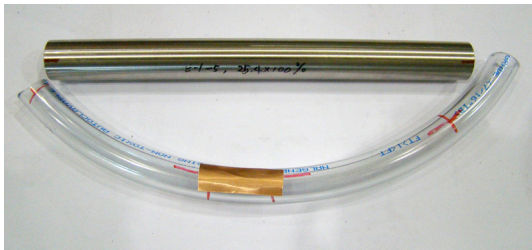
Tube specimen with a through-wall crack and insert bladder with foil
